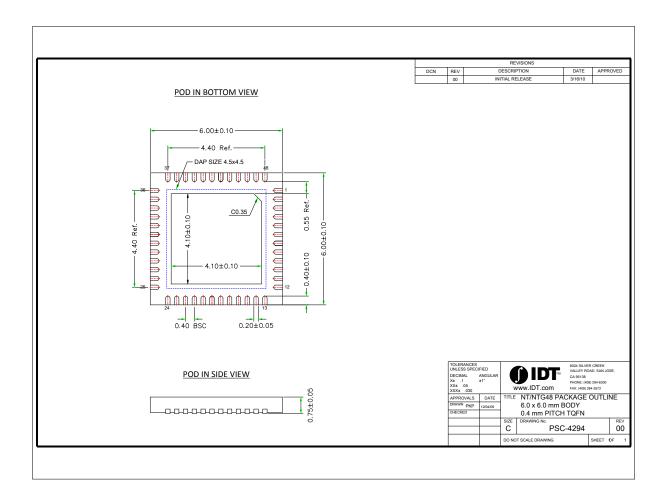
IDTP9036 Package Outline Drawing (NTG48 TQFN-48L 6.0 mm x 6.0 mm x 0.75 mm48L, 0.4mm pitch)
